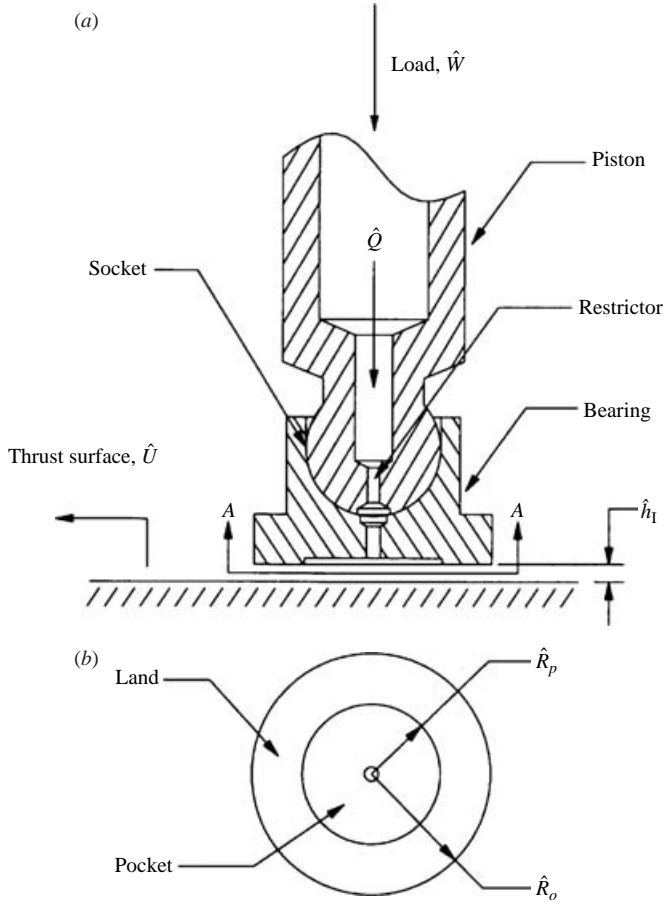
(a) Bearing piston assembly. (b) View A-A.
